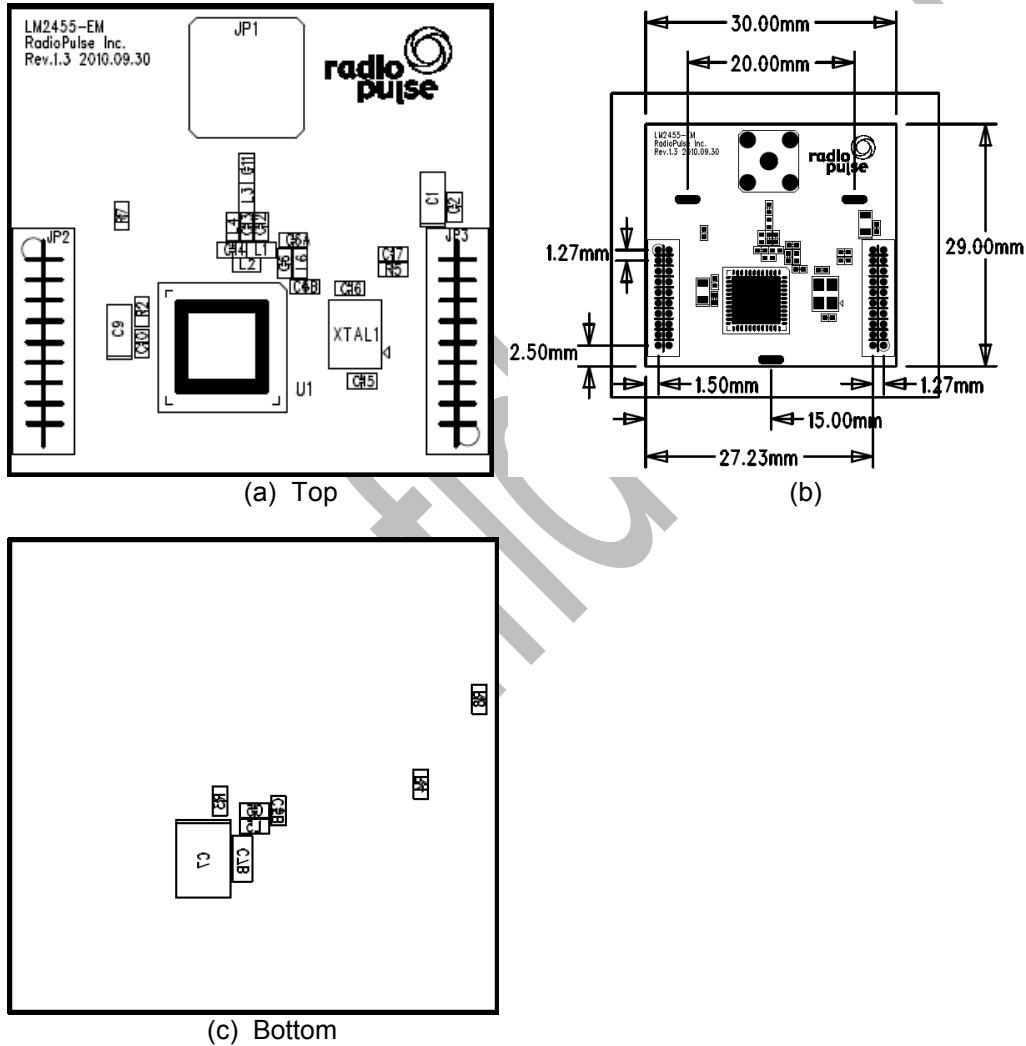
The dimension of the LM2455-EM(MG2455-F48)
